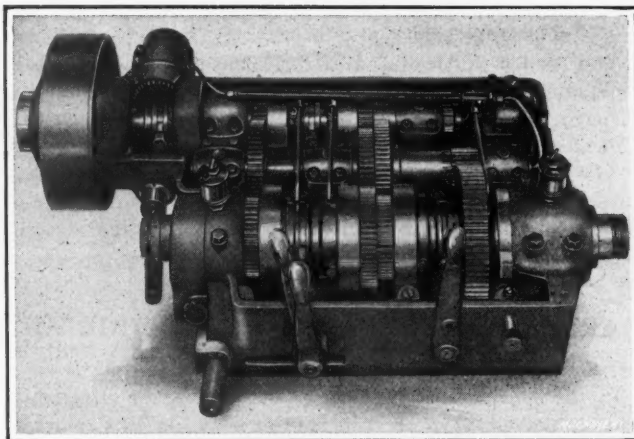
Gearing in the Head of the Reed-Prentice Lathe shown in Fig. 1
